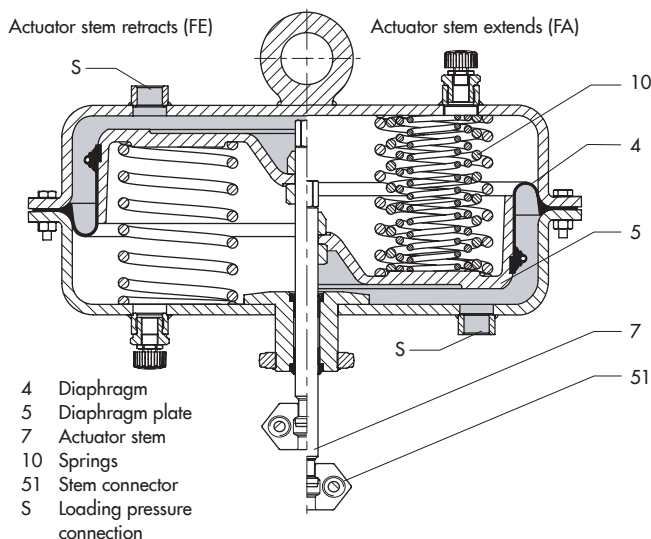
Sectional drawing of Type 3271, 1400-60 cm<sup>2</sup>
